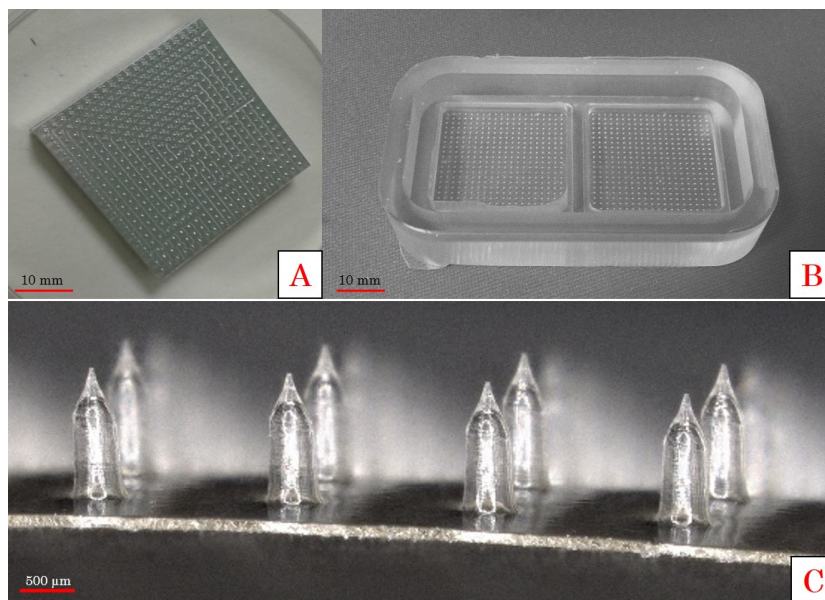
A: Aluminium master structure. B: Double female polydimethylsiloxane (PDMS) mold. C: Digital microscopy image of microneedles patch (MN-patch) fabricated by solvent casting molding method.
